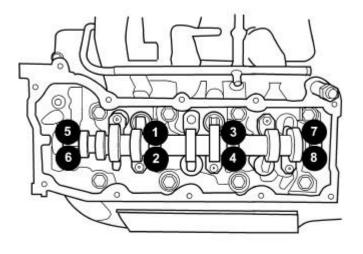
Valve Assembly Configuration Courtesy of CHRYSLER LLC
